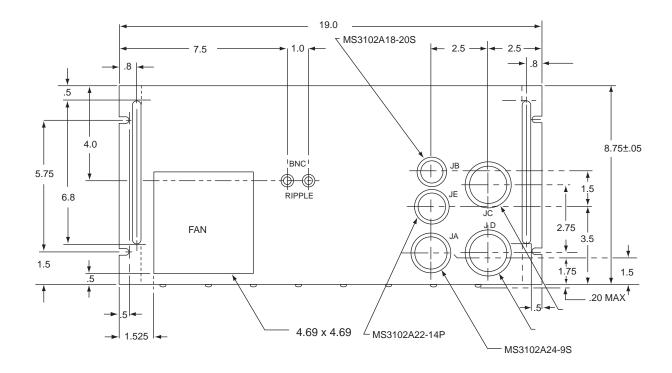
Installation Control Drawing Test Set PS 99022, P/N 11426-001
